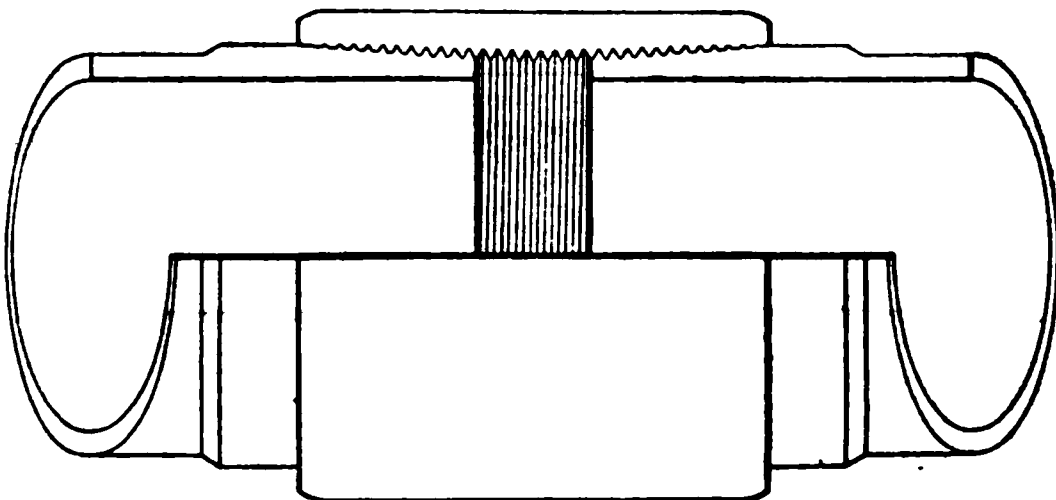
Typical Section of Allison Vanishing Thread Tubing Coupling and Joint — Ends Upset
